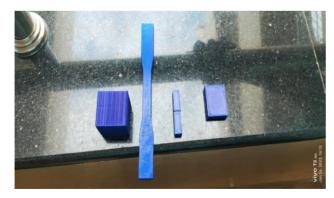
3D PRINTINTED Specimens on X-MAX 3D Printer
